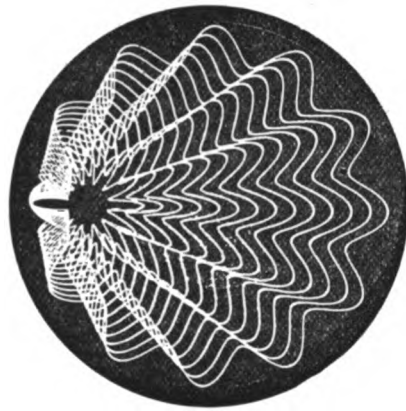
Oval Cam, Eccentric Chuck, producing shell pattern.
